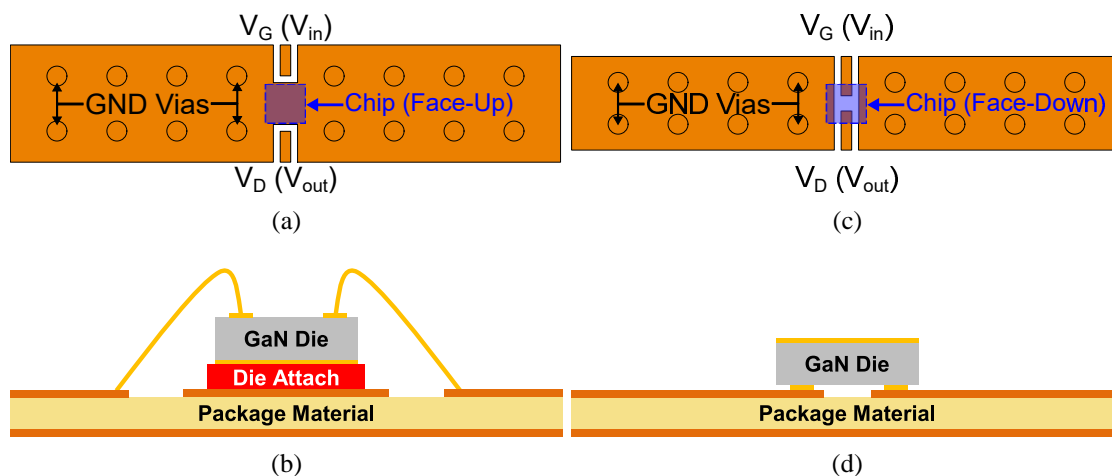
Traditional package interconnection strategies: Wire-bonding (a) layout and (b) cross-section, Flip-chip bonding (c) layout and (d) cross-section.
